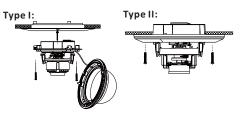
Fix the Camera to the Mount 6. Repeat steps 6-8 of the Ceiling Mounting section to complete the installation.
